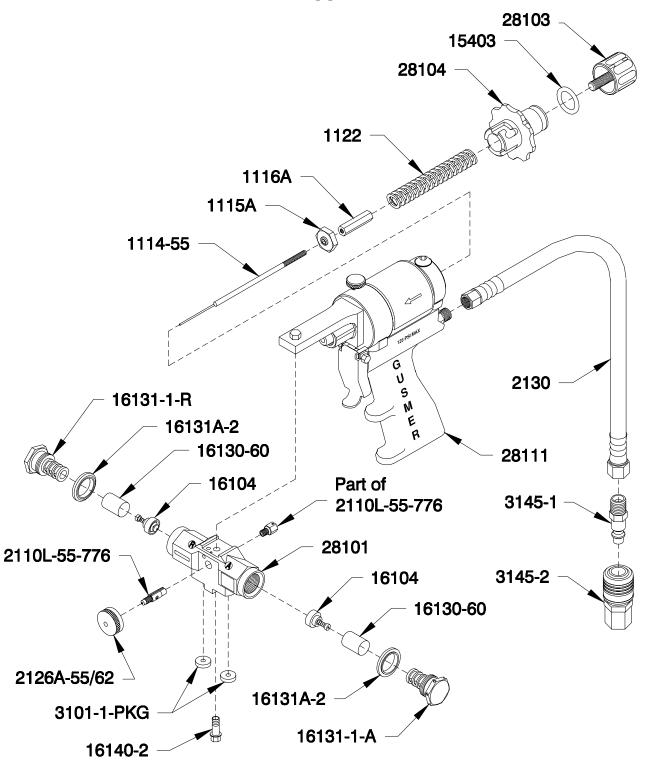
D-7 Spray Gun Assembly (Part No. 28100-55), Exploded View
